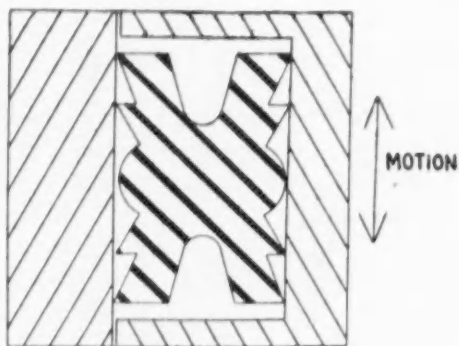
The v-o-ring combines the advantages of the v-ring and the o-ring. When seal is compressed only the small points contact the metal surfaces.
